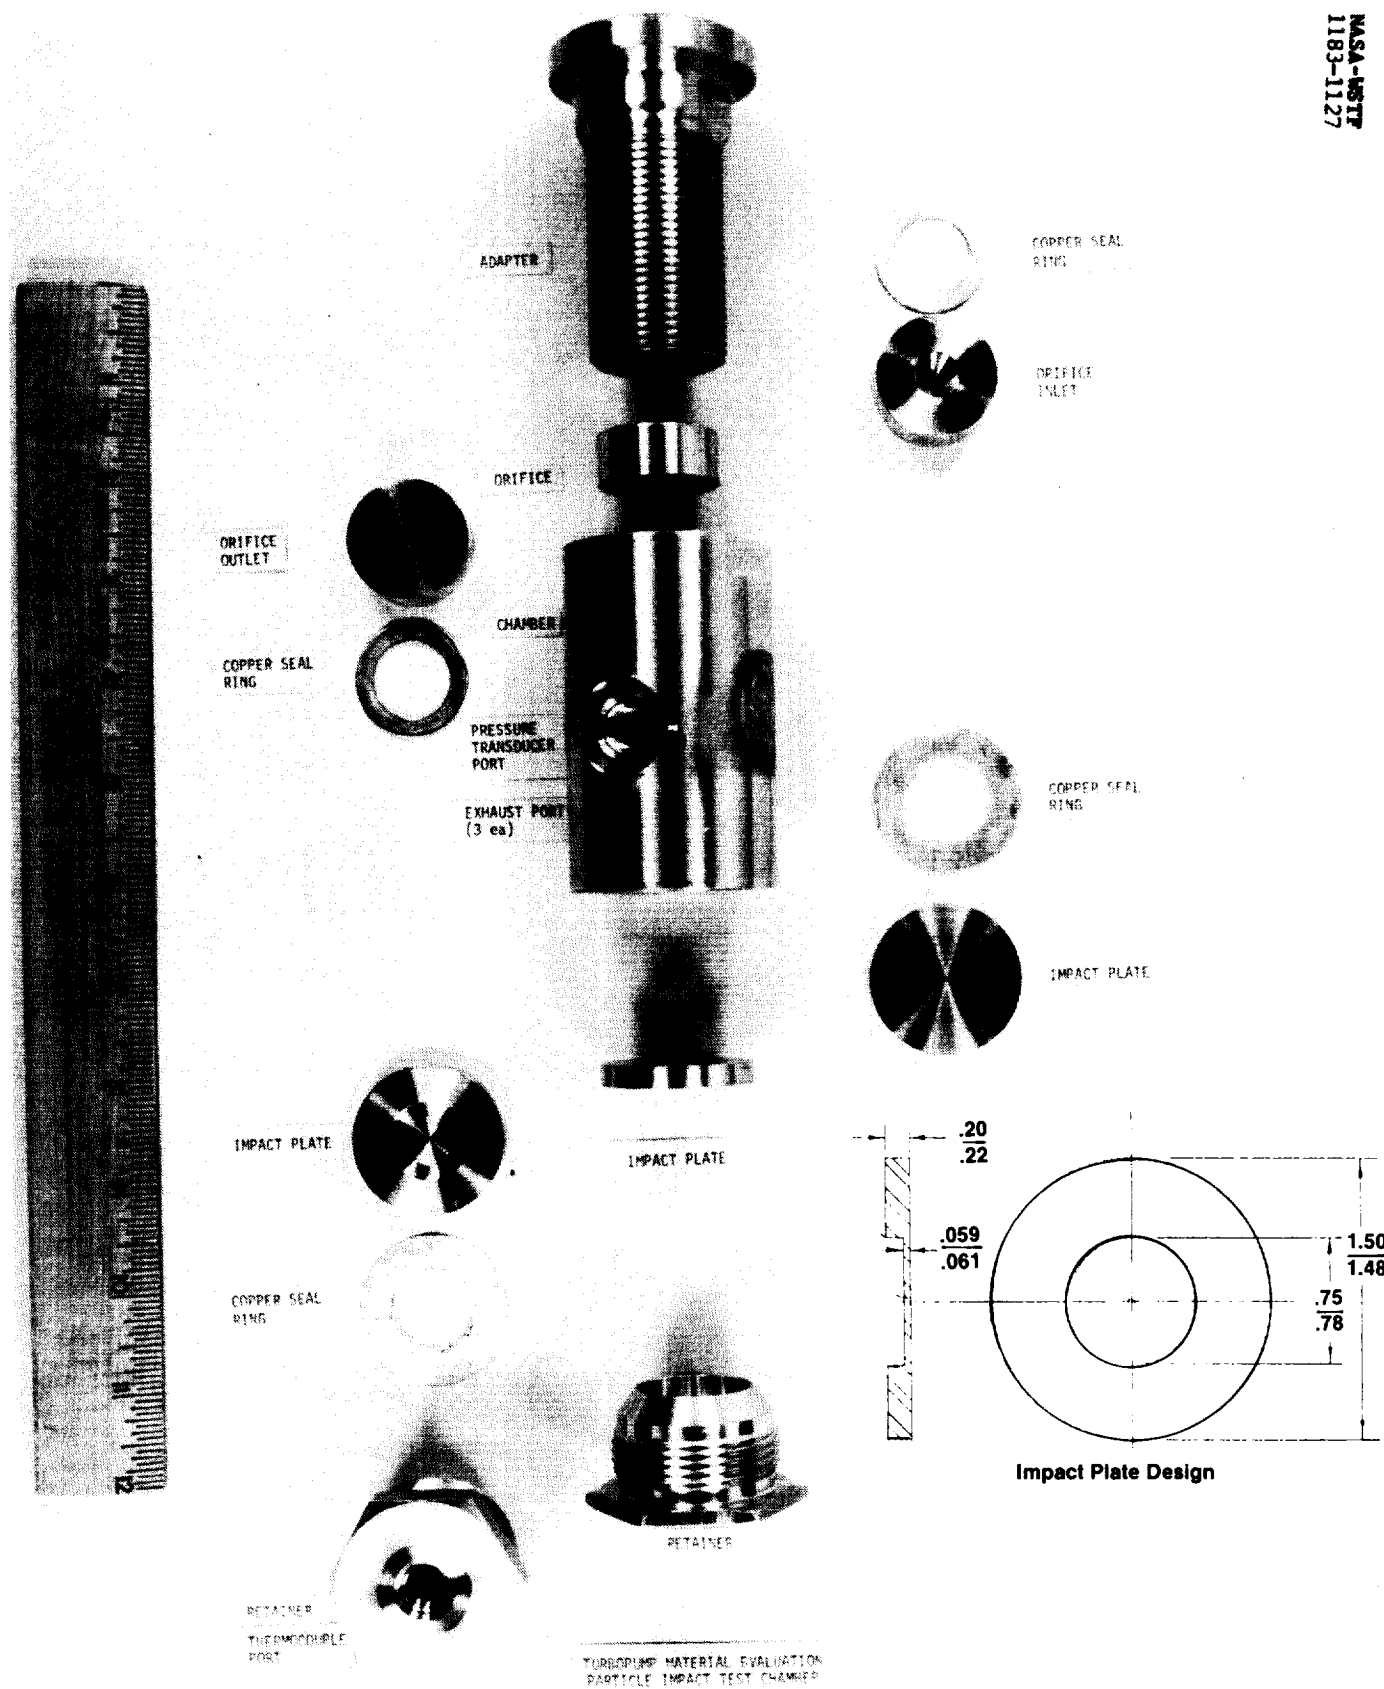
Particle Impact Test Assembly for Plate Impact Studies
